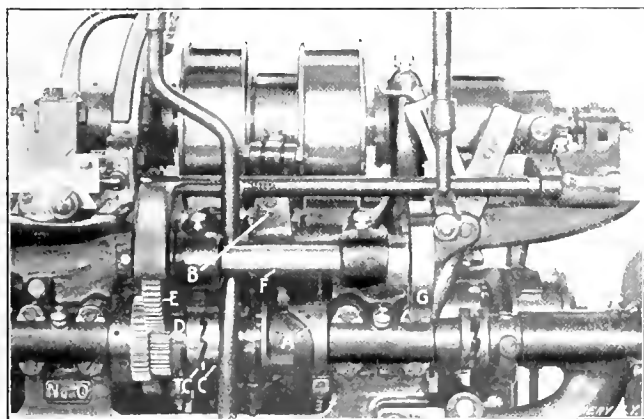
(Rear View) Number 0 Brown & Sharpe Automatic Screw Machine showing Reversing Mechanism and Belt Shifting Attachment
